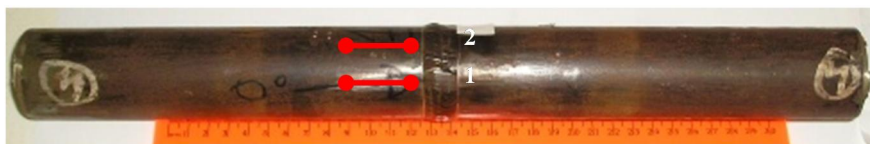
Welded joints on T92 steel tube. Points 1 and 2 indicate the red lines selected on the weld joint defining two distinct longitudinal alignments.
